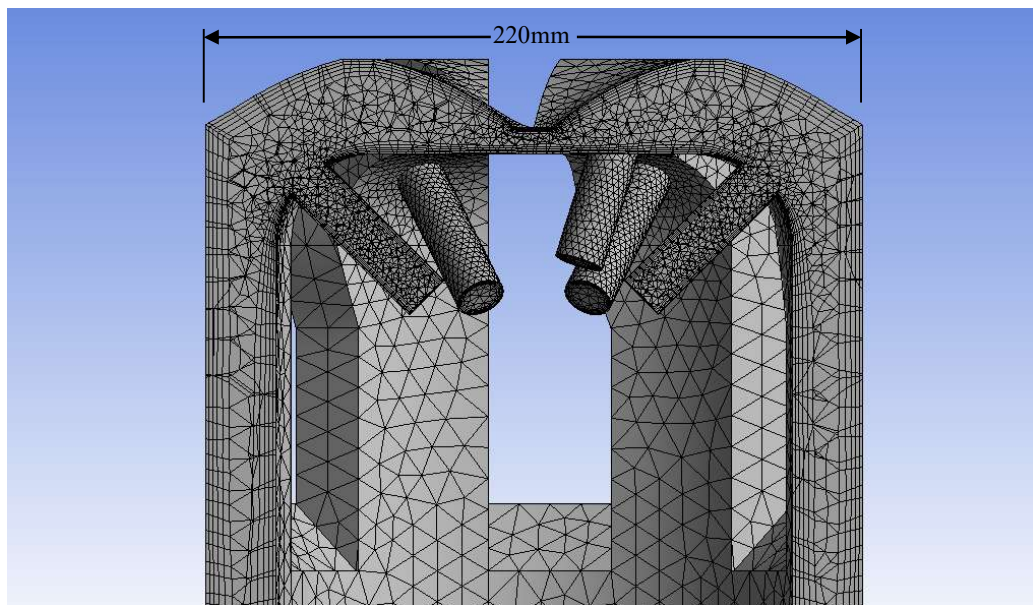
Cross-sectioned view of the meshed CAD model.
